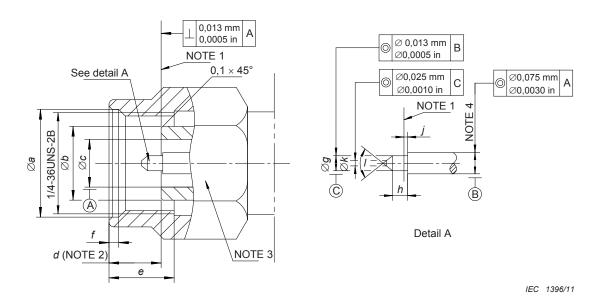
Connector with pin-centre contact (for dimensions and notes, see Table 4)
